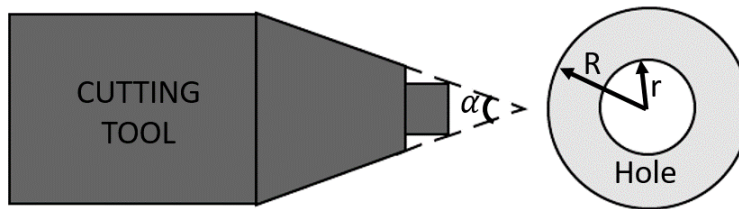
Diagram of the Cutting Tool and a machined Hole.
